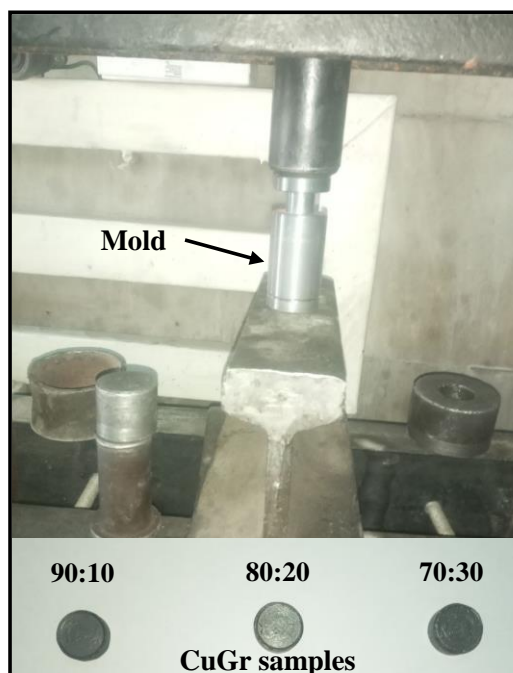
Cold mechanical pressing process, stainless-steel mold and obtained CuGr samples.
